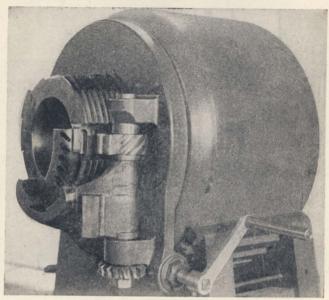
Breech Mechanism, Old Type, for 14-in. Guns.
